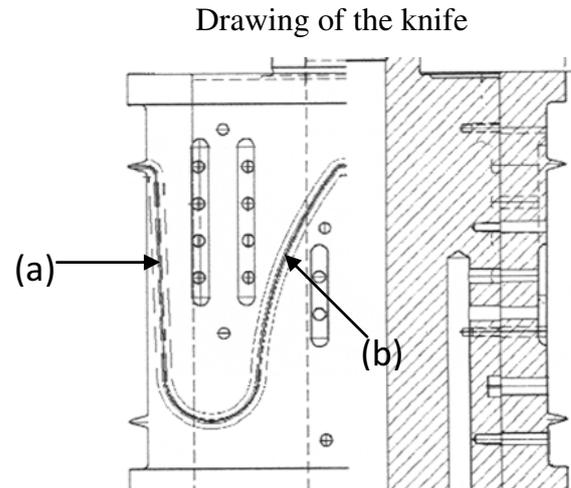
Drawing of the knife. The sharp profiles (a) and (b) produce the impacts on the anvil.
